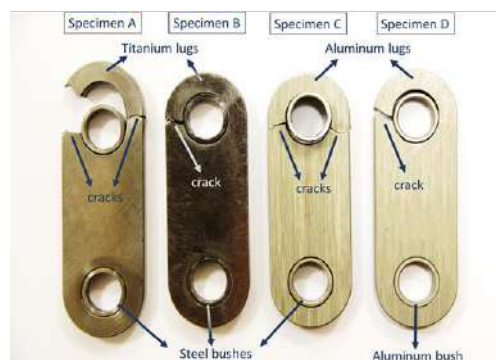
Investigated lug-bush joints consisting Ti and Al lugs combined with Al and steel bushes.
